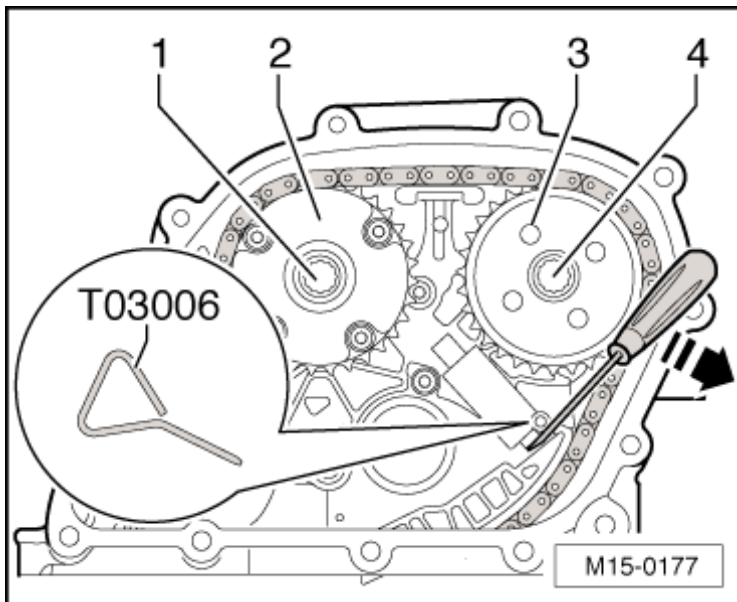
Identifying Chain Sprockets Placed Into Timing Chain
